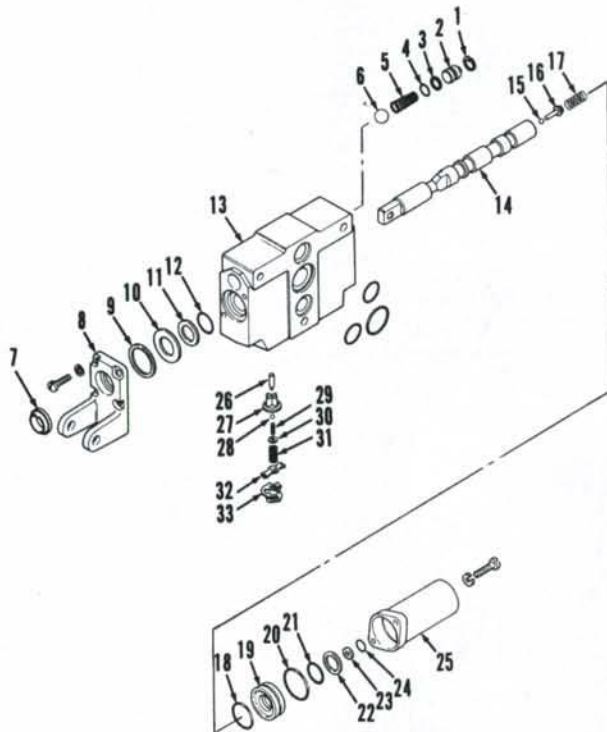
Exploded view of Bosch No. 052169006 auxiliary valve. Detent assembly not shown. Refer to Fig. 171 for legend except for the following.
